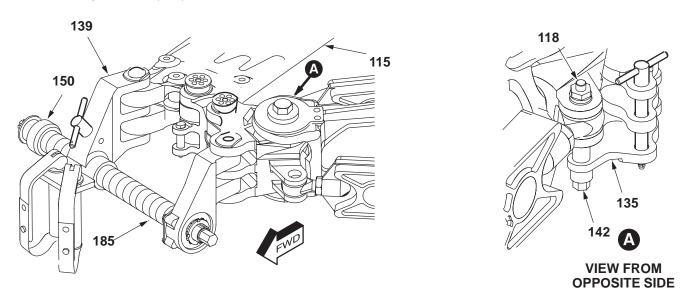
R/H Auxiliary Blade Positioner and Swing Link in Folded Position
